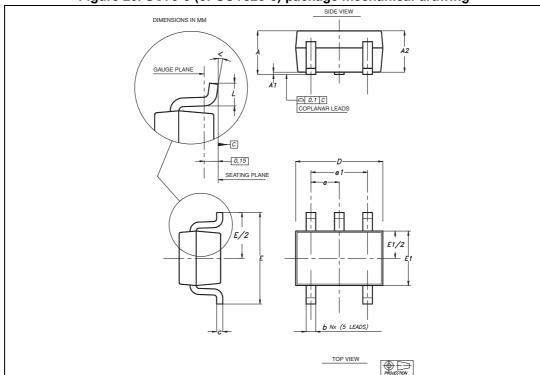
SC70-5 (or SOT323-5) package mechanical drawing
